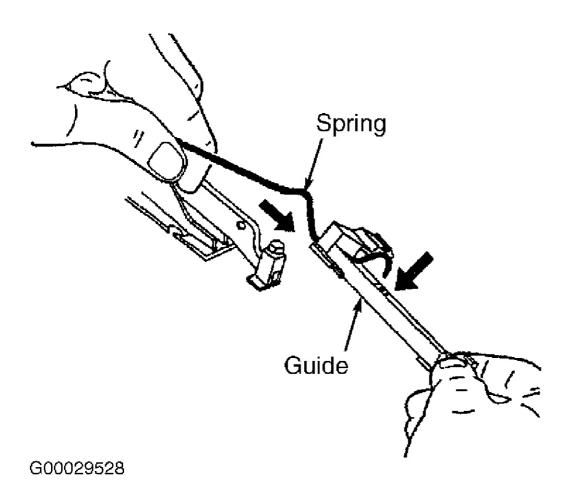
Removing & Installing Spring From Guide Courtesy of GENERAL MOTORS CORP.
